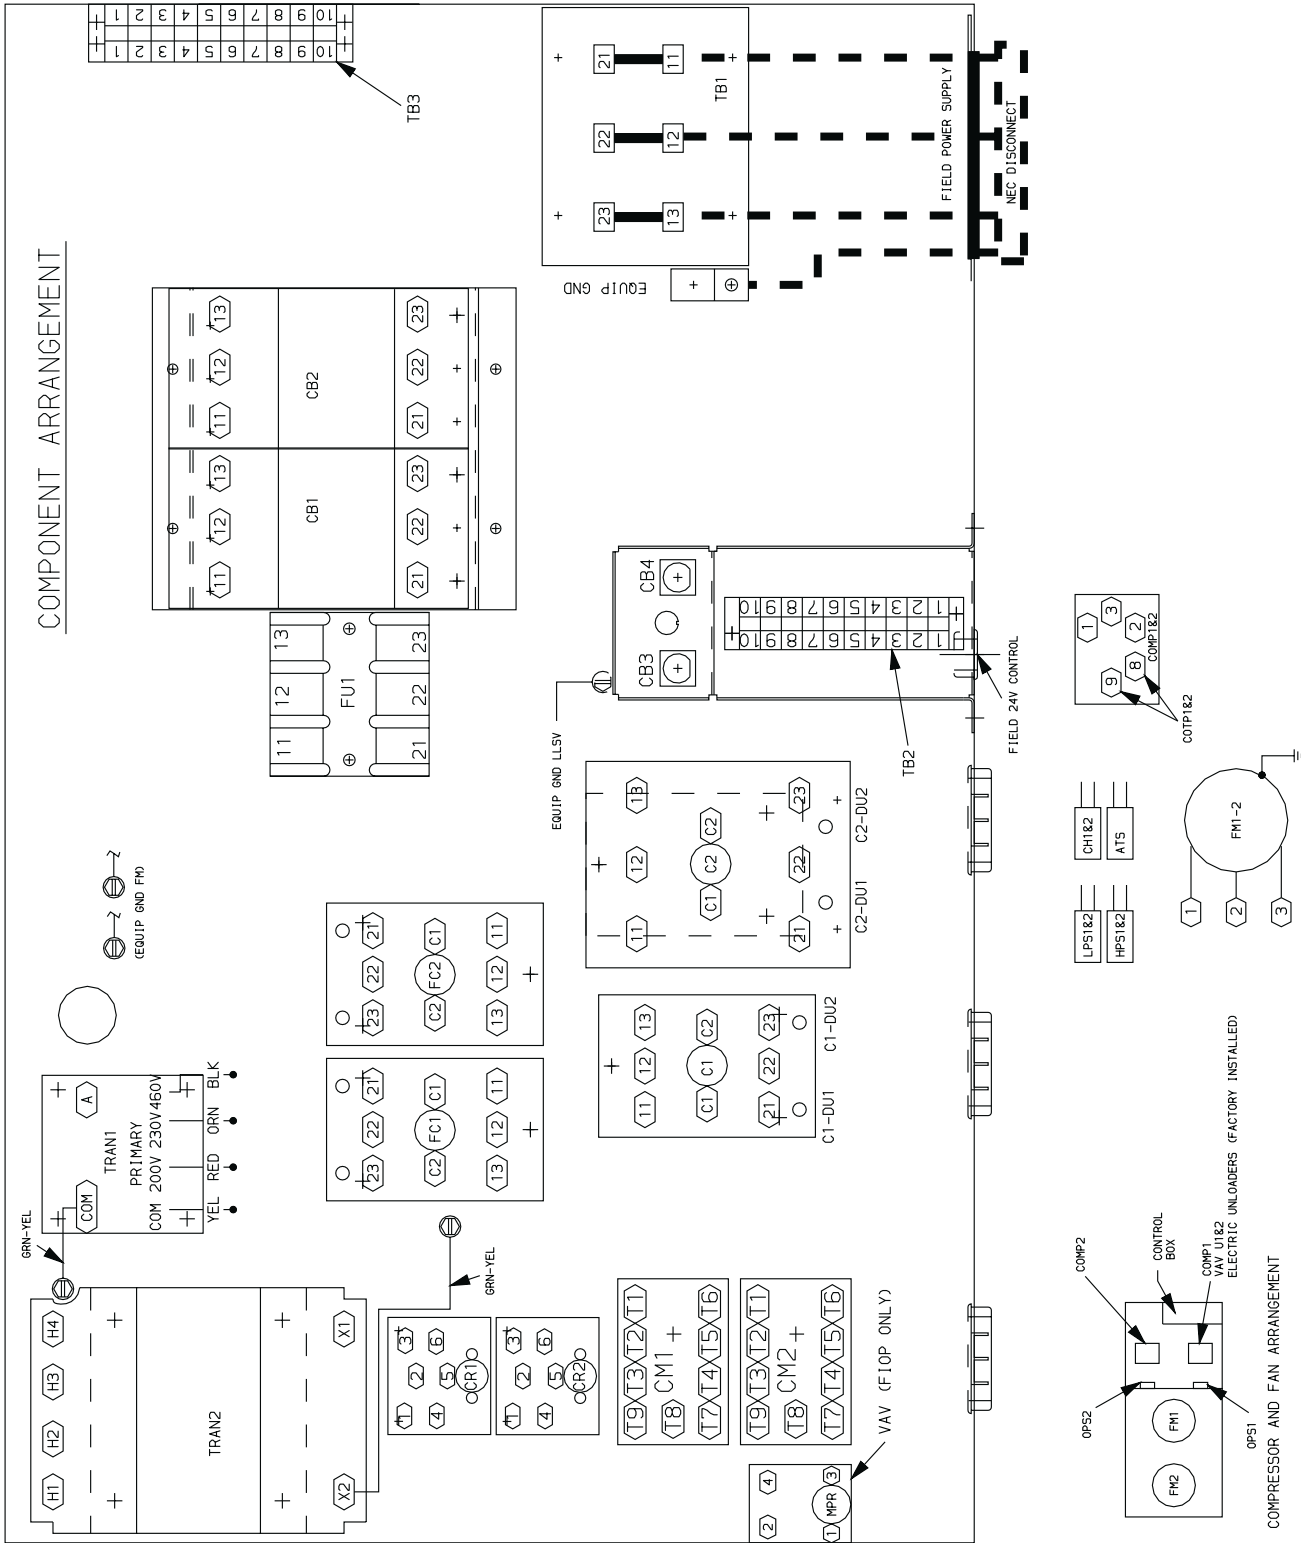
Component Arrangement, 38AH024-034, 208/230-3-60 and 460-3-60 Units
